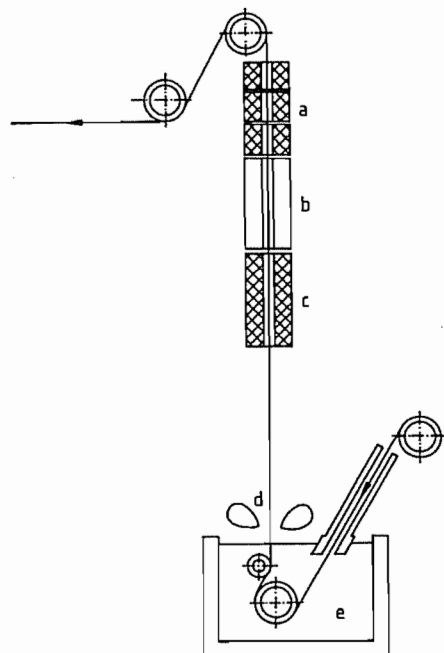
Hot-dip zinc coating by the Galvannealed process: a) Cooling zone; b) Holding zone; c) Heating zone; d) Nozzles; e) Zinc bath.
